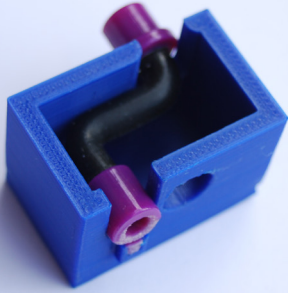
shows the model making use of 100% FLX and the tubes floating 0.3 mm above the surface. Both support in enabling the tube of more freedom to deflect when compressed. Unfortunately, this prototype fails at the corners as well.
